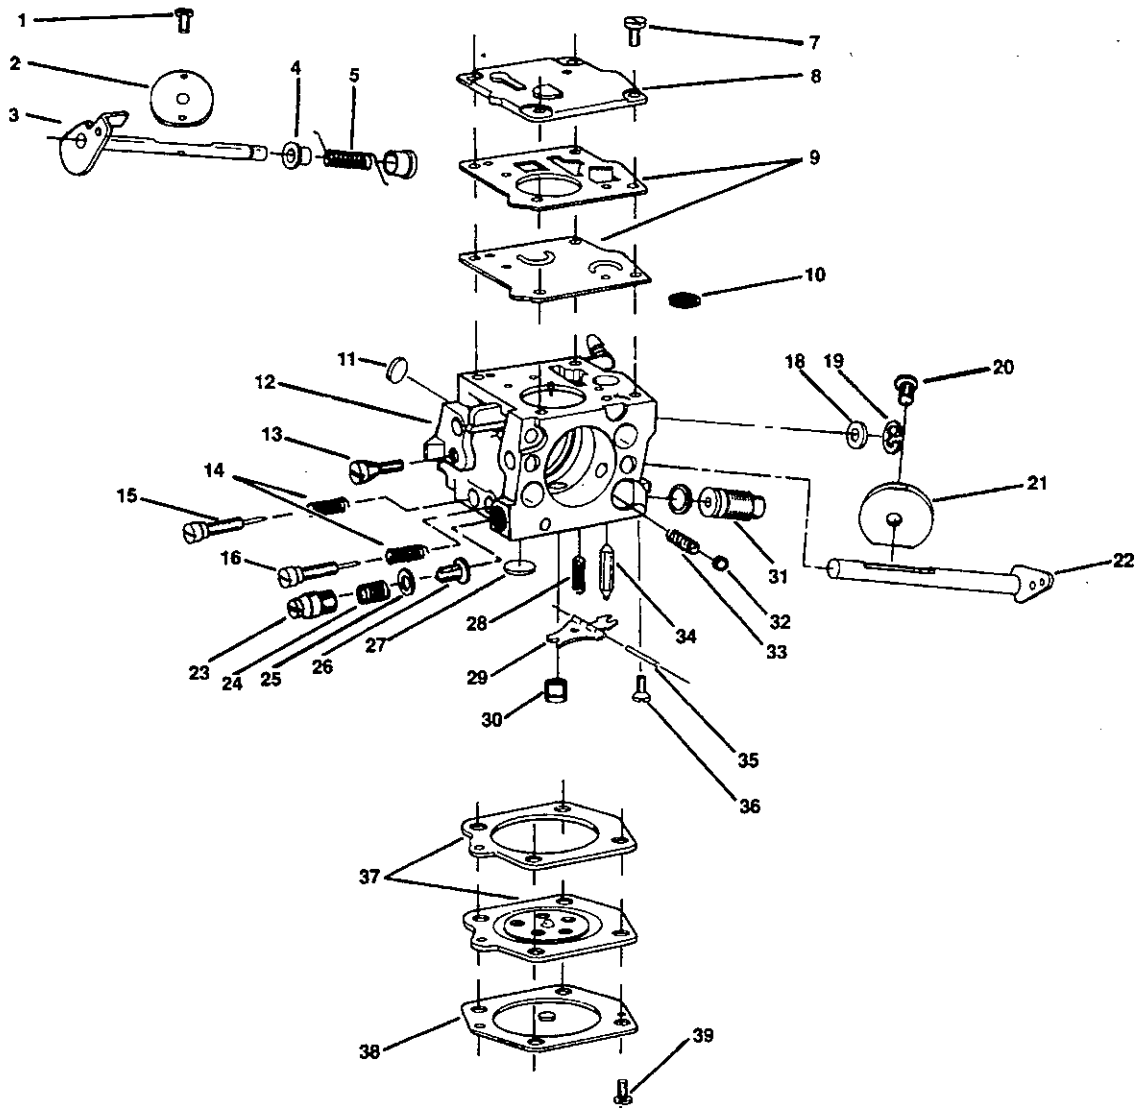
FIGURE X - PARTS LIST CARBURETOR PARTS AND KITS
